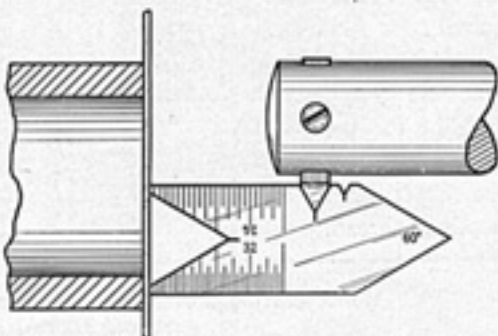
Cutter bit should be set square with work, as shown above for cutting internal screw threads.
